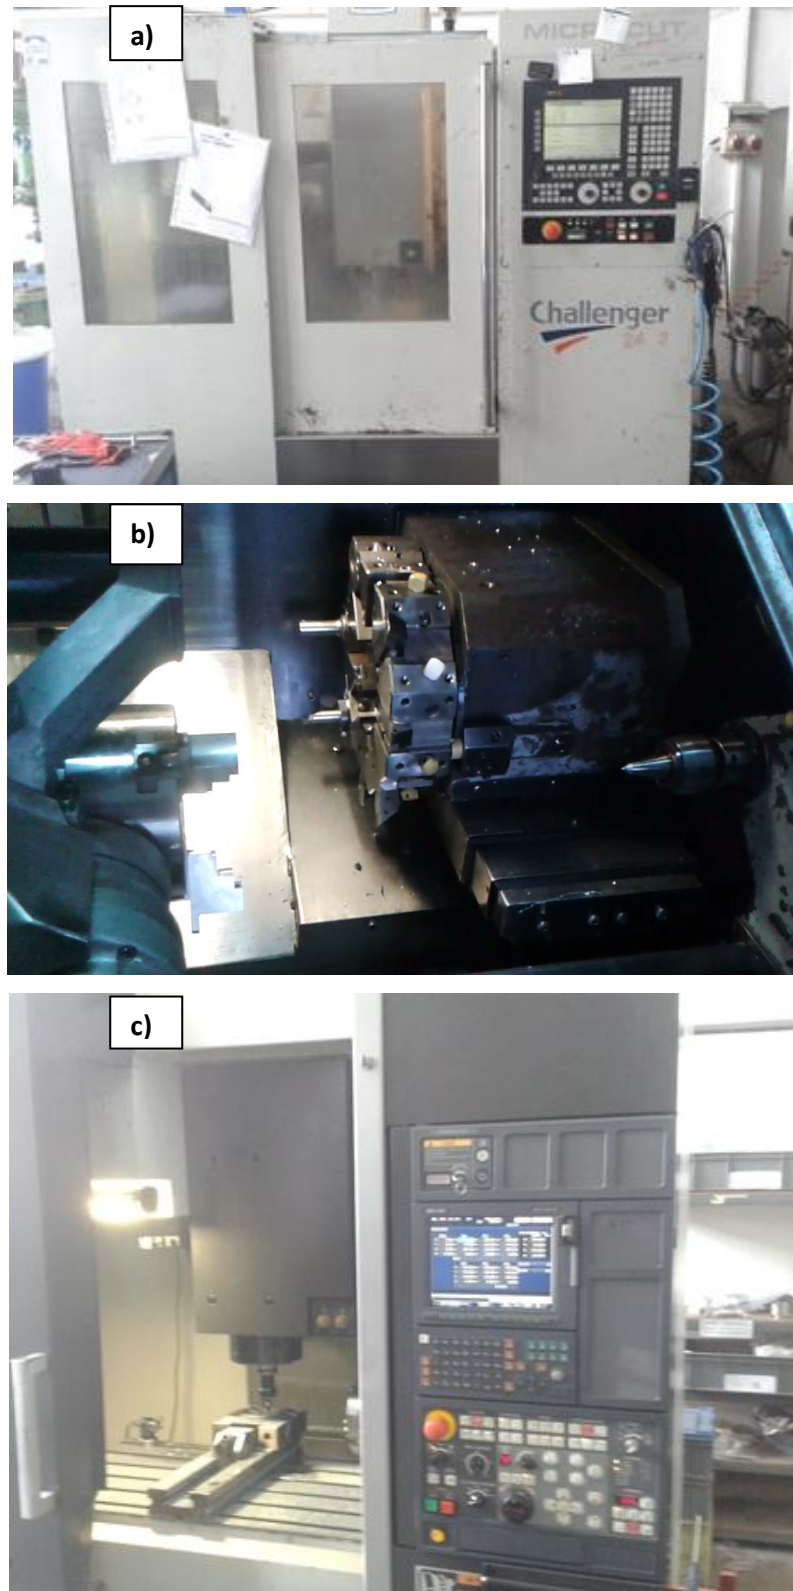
a) Microcut CNC fraise, 3-axis, b) Mazal turning machine, automatic c) Mori Seiki CNC fraise, 4-axis
